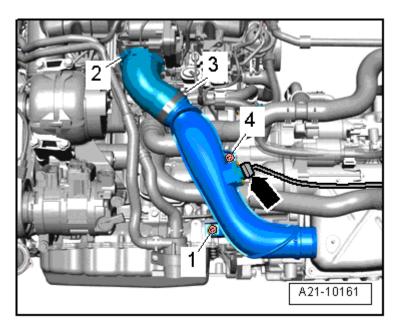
Air Guide Hose Bolts, Air Guide Pipe Hose Clamps & Electrical Harness Connector
